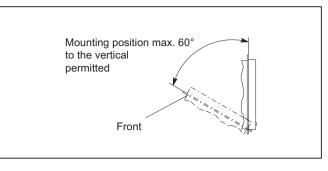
Dimension drawing for mounting the CNC full keyboard KB 483C
